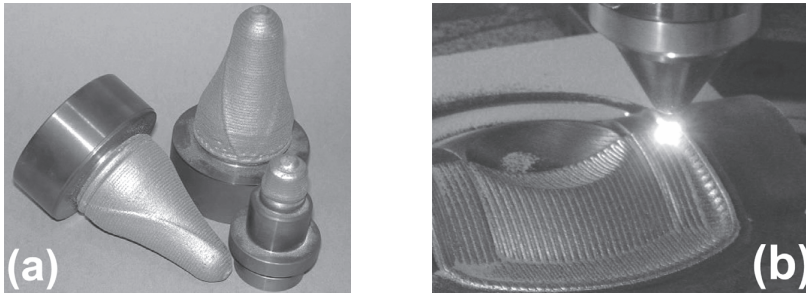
(a) Laser-clad coated glass plungers, (b) laser cladding of a hot-forming die<sup>8,11</sup>.
